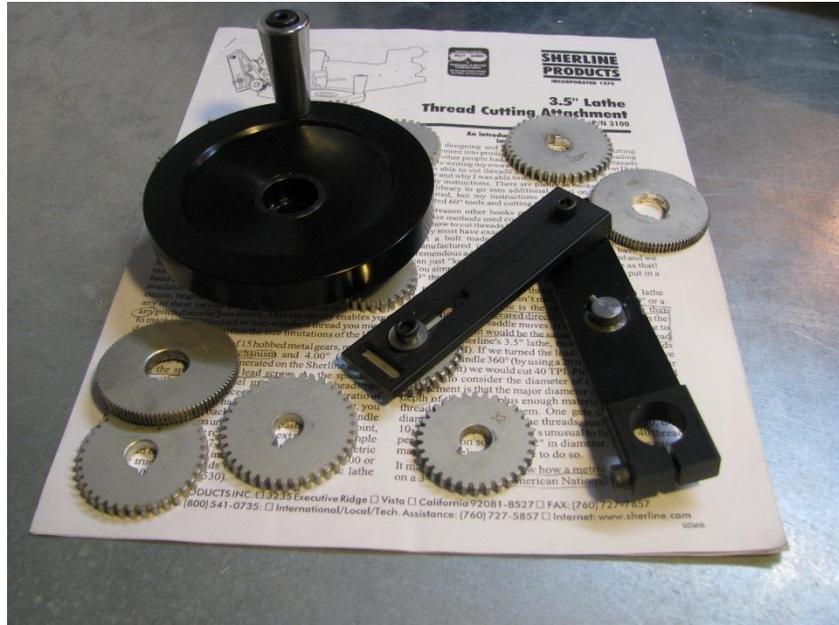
Components of the gear-cutting accessory for the Sherline lathe from Sherline.
